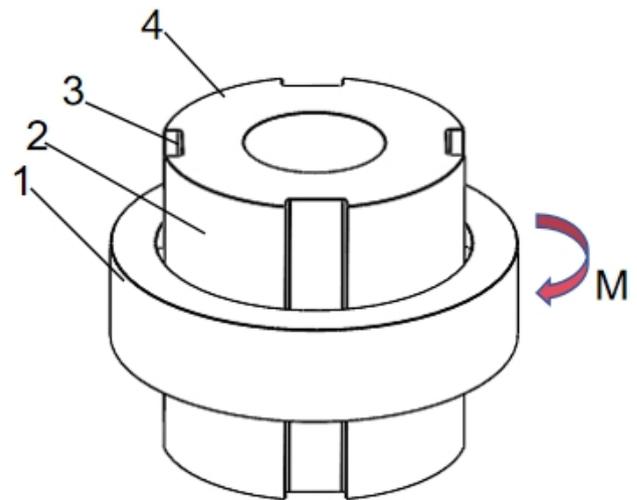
The principle of screwing and unscrewing grooved drill pipes
